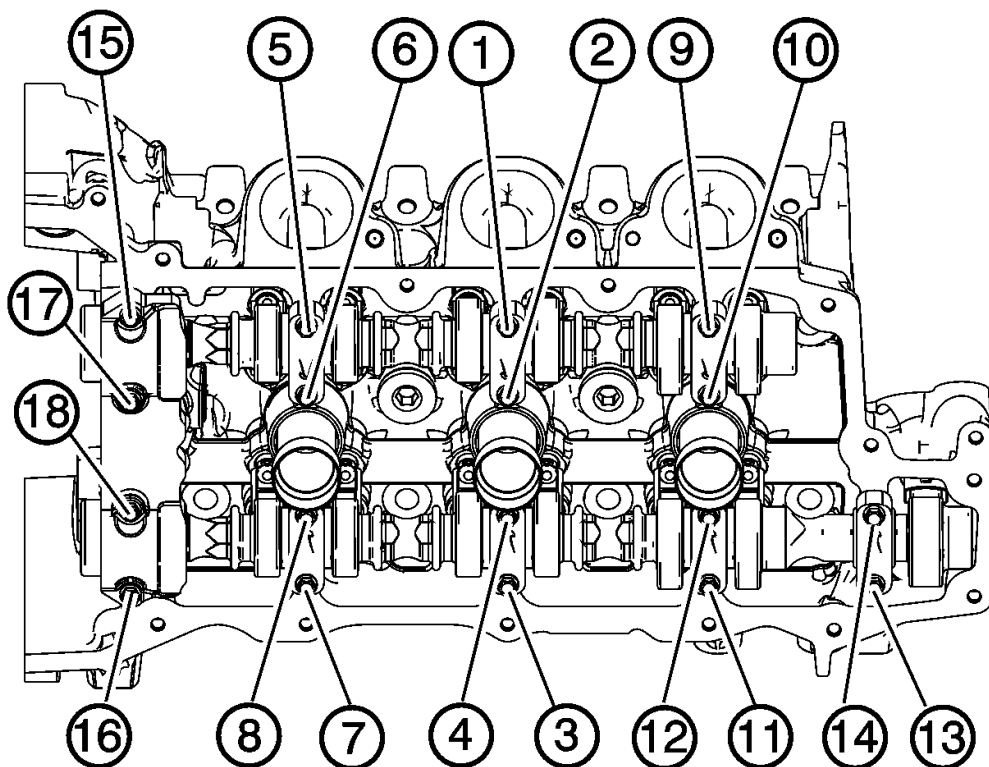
Identifying Camshaft Bearing Cap Bolt Tightening Sequence
